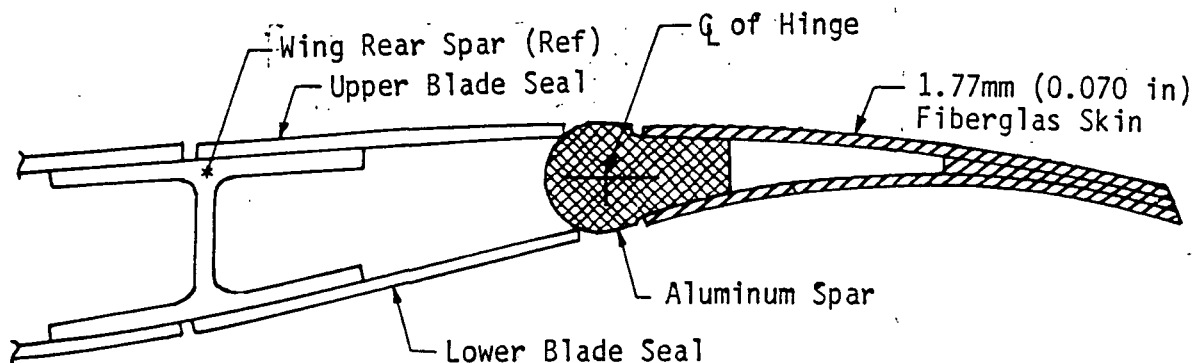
DAST ARW-1 AILERON SECTION VIEW
